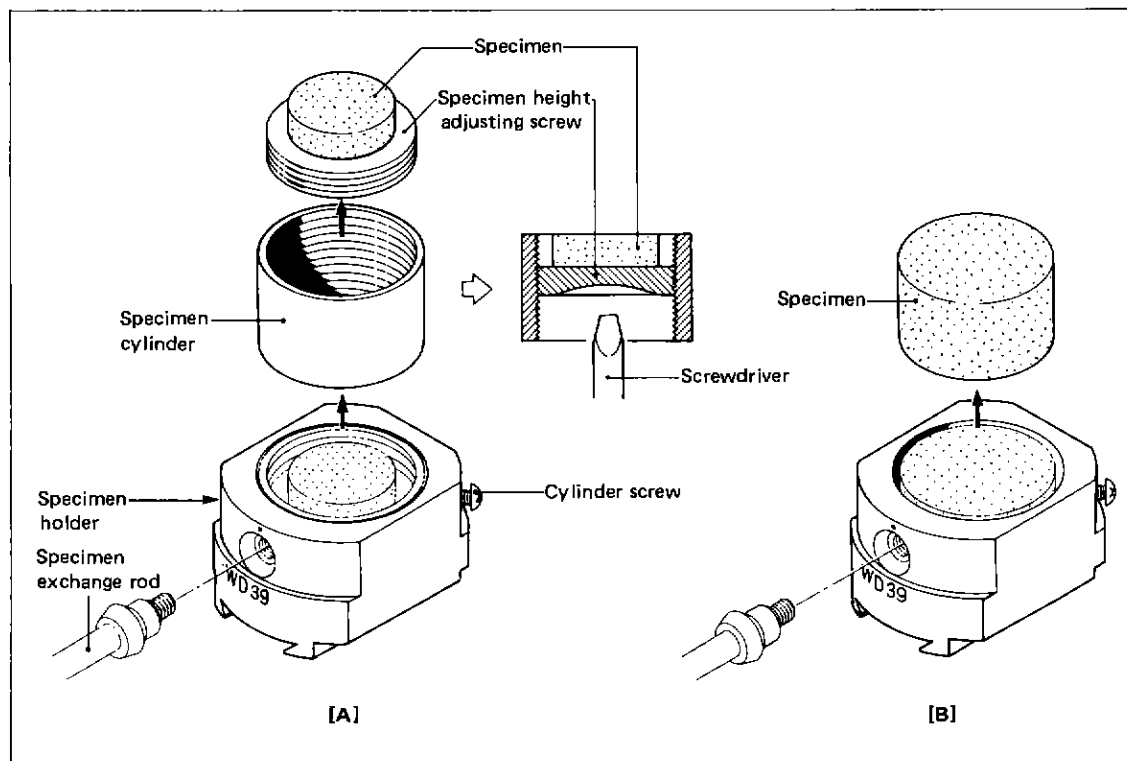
Exchanging specimen on WD39 specimen holder
